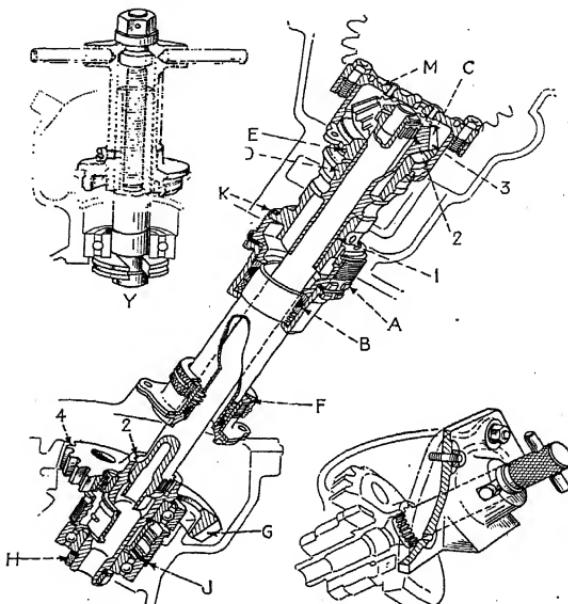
Camshaft drives and tools for disassembling them. See Table 5 for list of fits and clearances.
